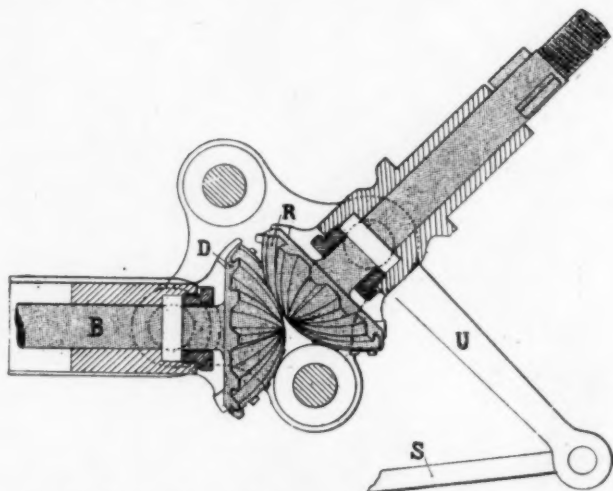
Spindle-Controlling Mechanism *B*, the Motor-Shaft. *D*, Gear carried by the Shaft. *R*, Gear carried by the Spindle. *U*, Steering Rod for the Right Wheel. *S*, Steering Lever.
